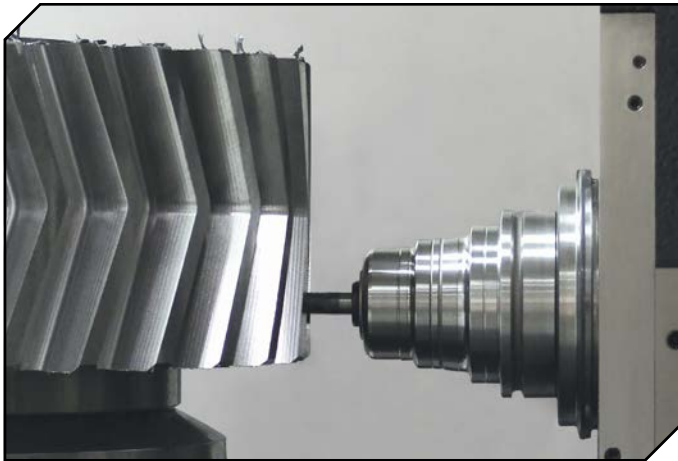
Gleason-Heller machines can accommodate a wide range of larger bevel and cylindrical gear types, including herringbone and double-helical.
